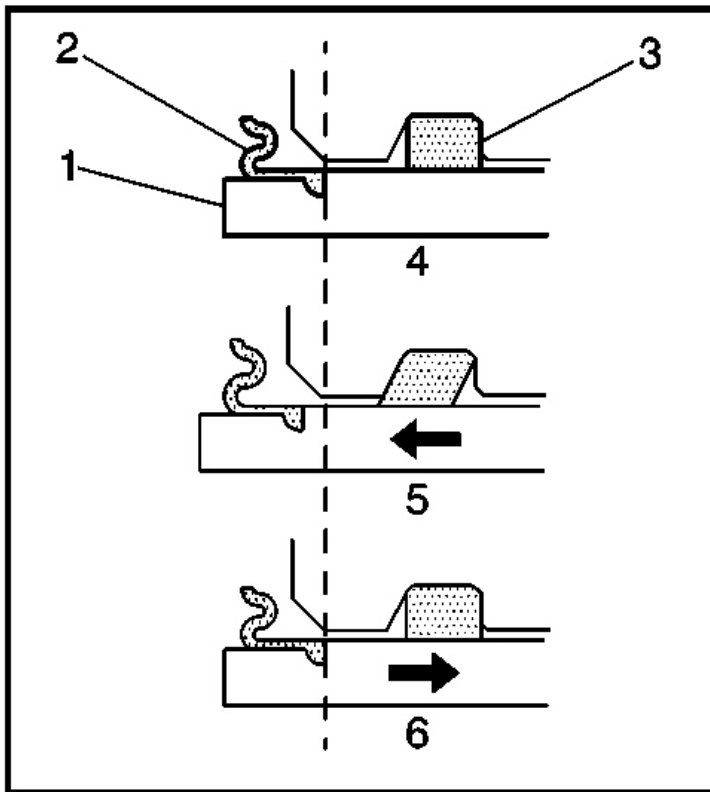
Exploded View Of Caliper Piston Terminal Identification
